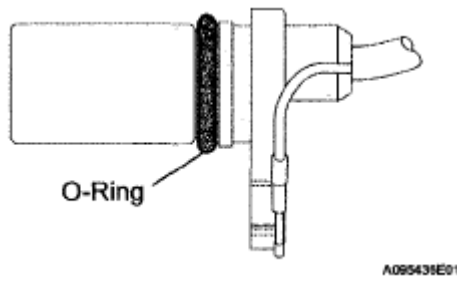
Applying Light Coat Of Engine Oil Onto O-Ring
